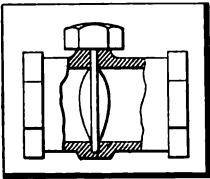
Illustrating a common form of butterfly throttle valve. The valve is often punctured by a small hole so that the engine will just turn over when the valve is closed
